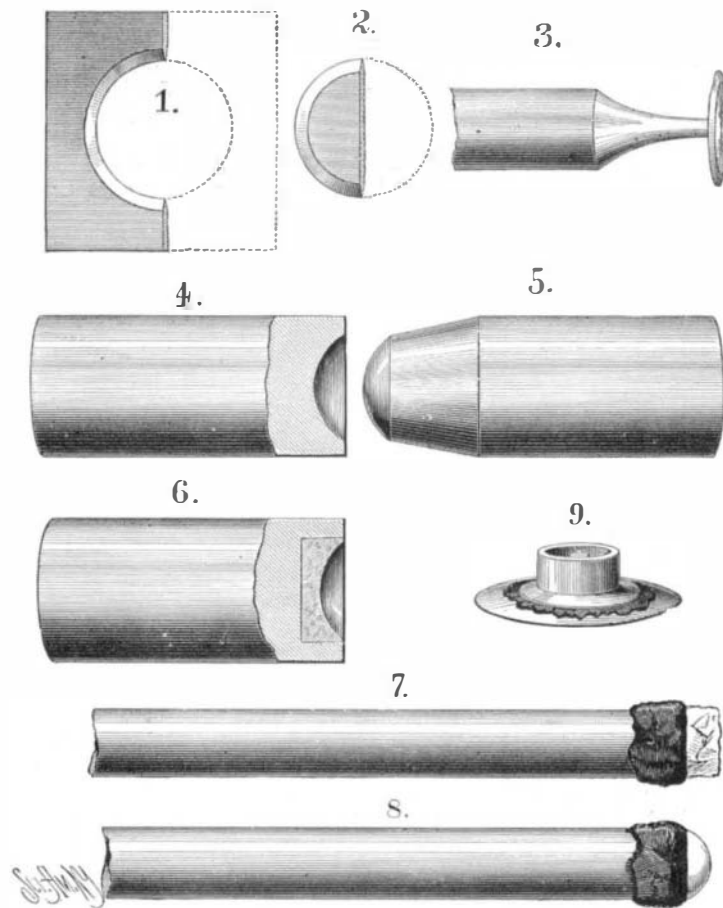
LENS GRINDING ATTACHMENT FOR FOOT LATHES.
